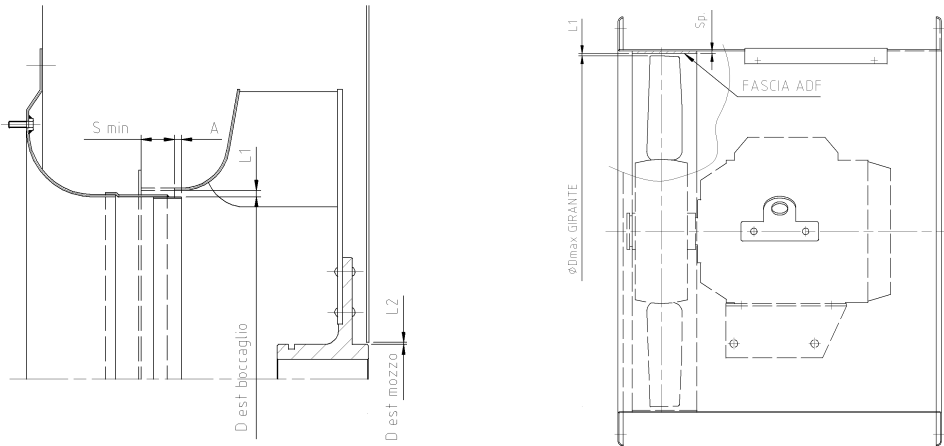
Typical assembly section of a centrifugal fan and an axial fan.
